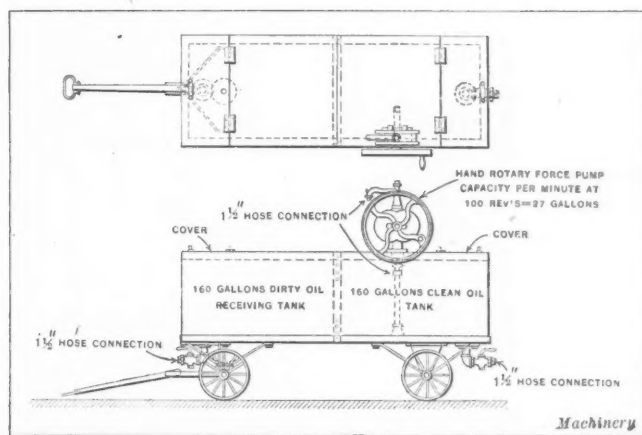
Truck used for removing Dirty Oil from Machines and substituting Supply of Clean Oil
